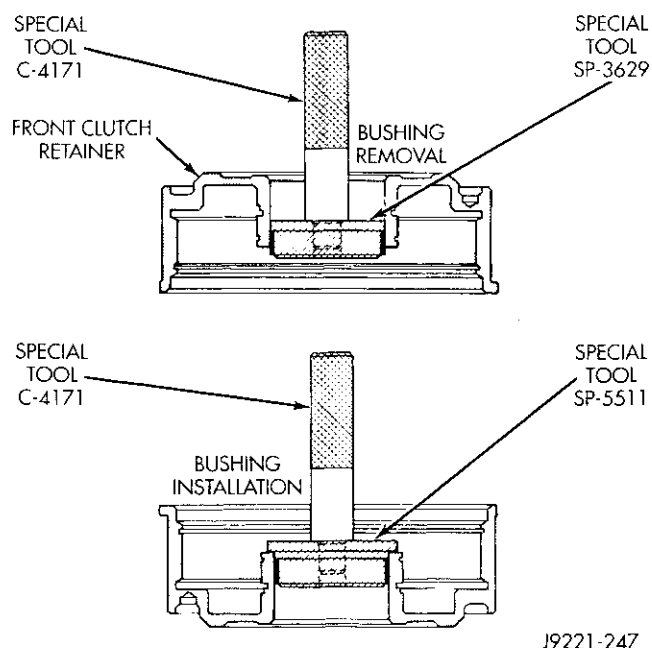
Front Clutch Retainer Bushing Replacement Tools
